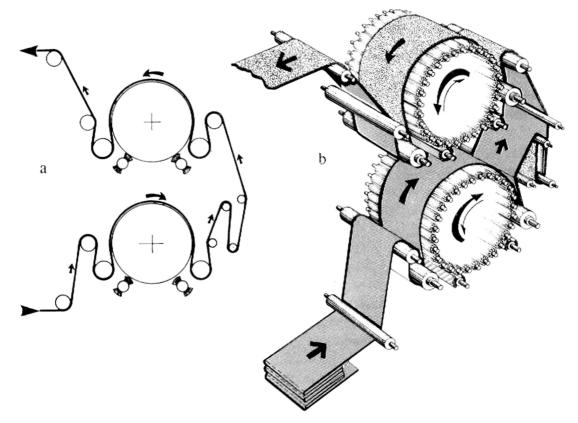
Raising of fabric right and back side : a) scheme; b) view
